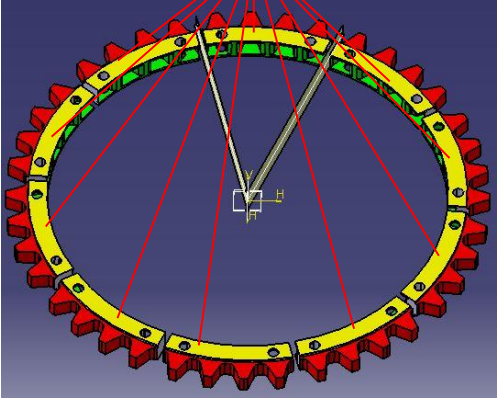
The complete 3D drawing of the slip-on sprocket without sectioning
